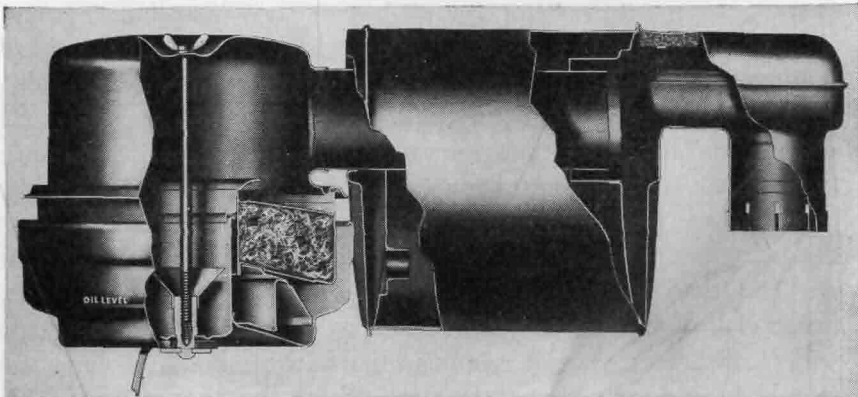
Air cleaner for an eight-cylinder engine. The space limitations under the hood make it necessary to use a partly horizontal cleaner on this application. (Oldsmobile Division of General Motors Corporation)
